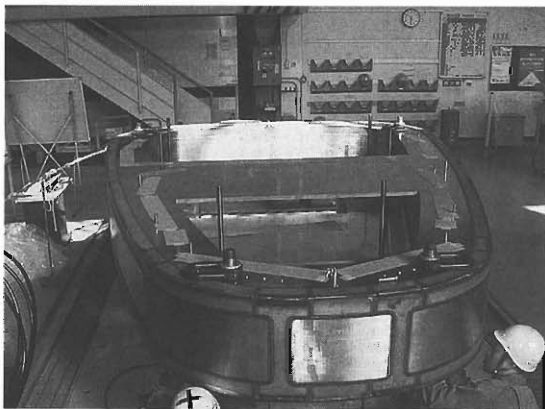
Completed main coil covered with its vessel. Welding lines for sealing can be seen.
